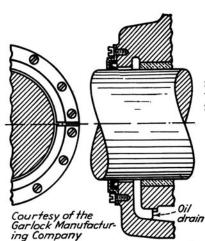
When oil seals are to be installed after a mechanism has been assembled or to preclude the necessity of disassembling heavy shafts and bearings when making seal renewals, split seals can be used in such installations. The spreader spring and packing ring are split, whereas the retaining cup is made in two halves. The packing is scarf-cut to form an oiltight joint when assembled.
